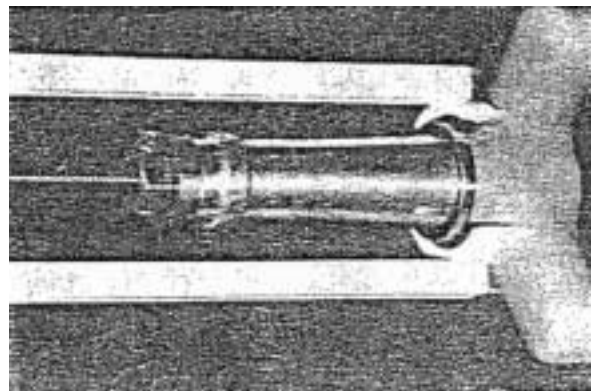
The headset tool in position to remove the lower bearing on the fork.
